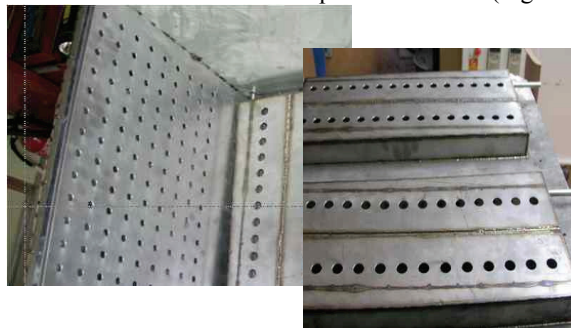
Optimized fuel and air chamber design by using CFD simulation technique
